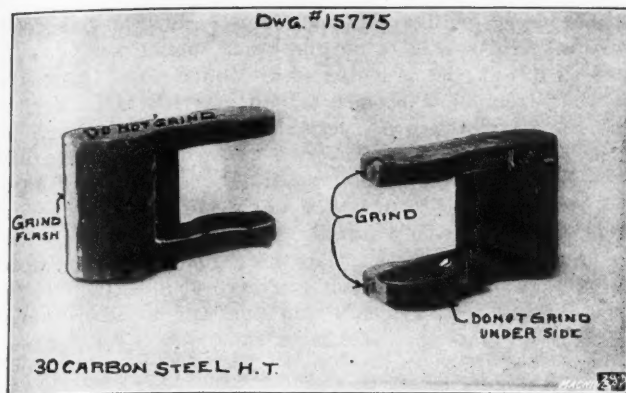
Forging with "Do Not Grind" Surfaces to be finished in a Subsequent Operation
